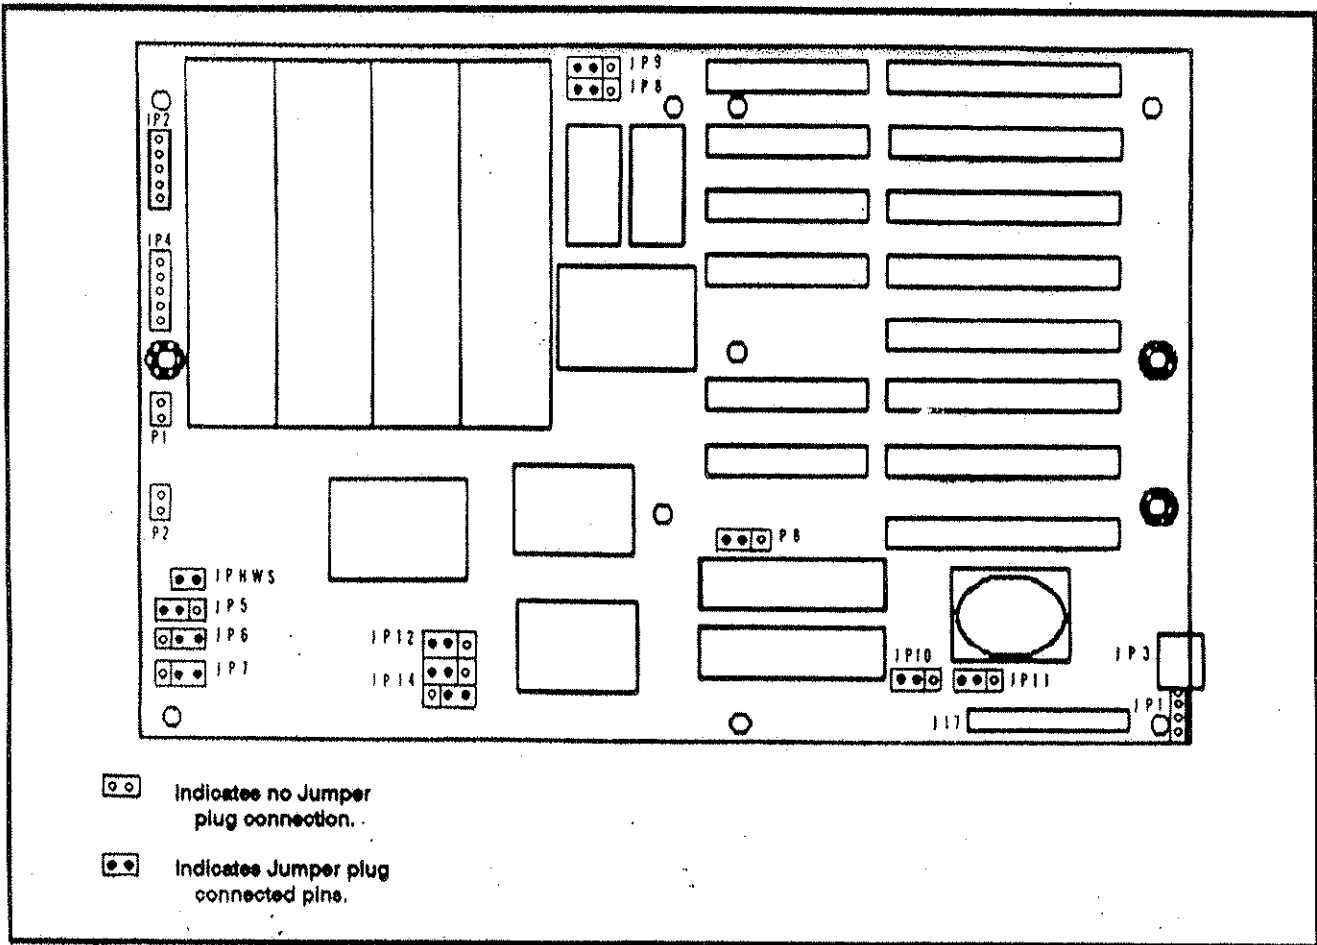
CPU Mother Board Assy 4A1, Jumper Plug Locations.
